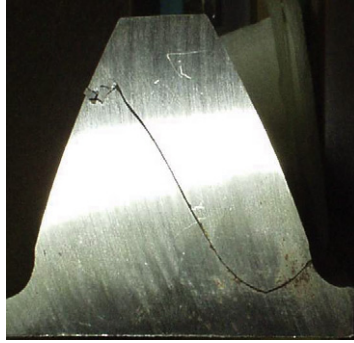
Damage to gear tooth due to high tooth loads (courtesy Lufkin Industries, Inc.).
